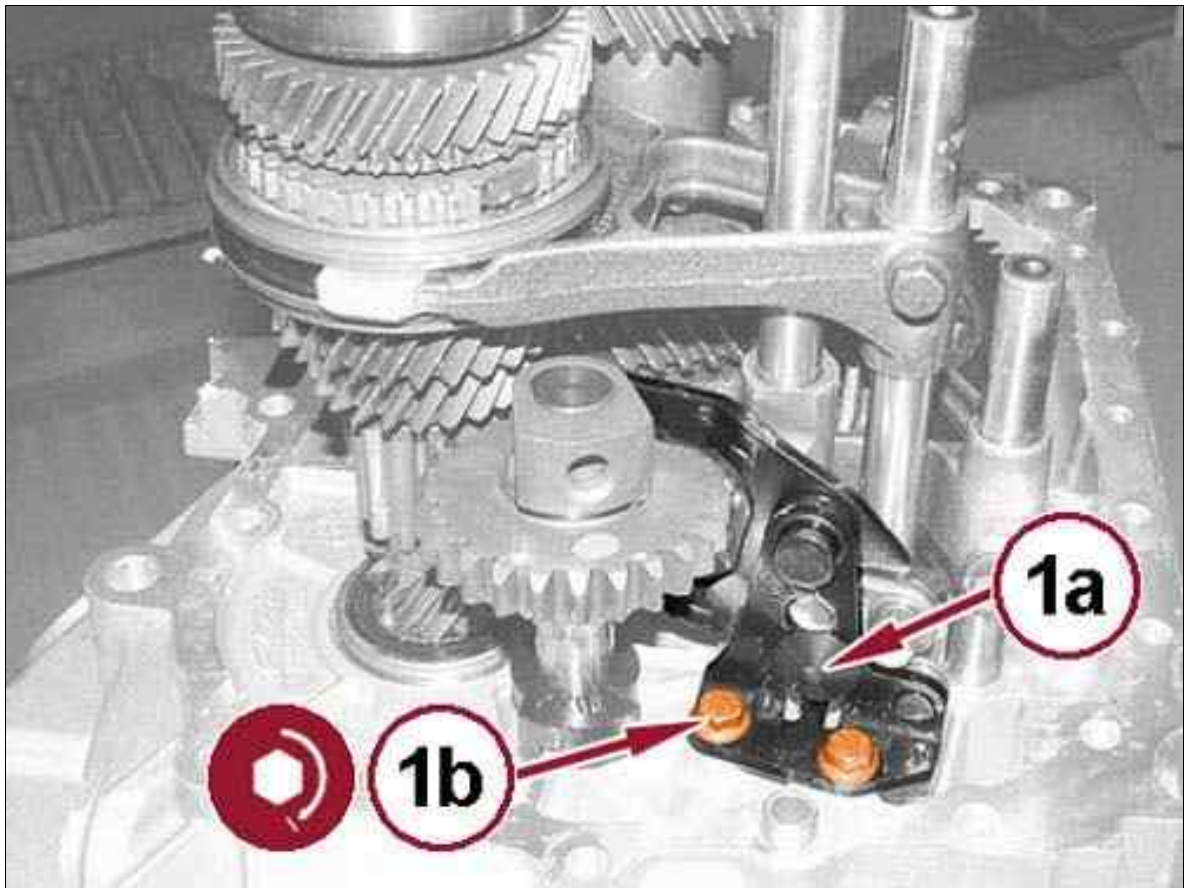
1st And 2nd Gear Shift Rail With Shift Fork
